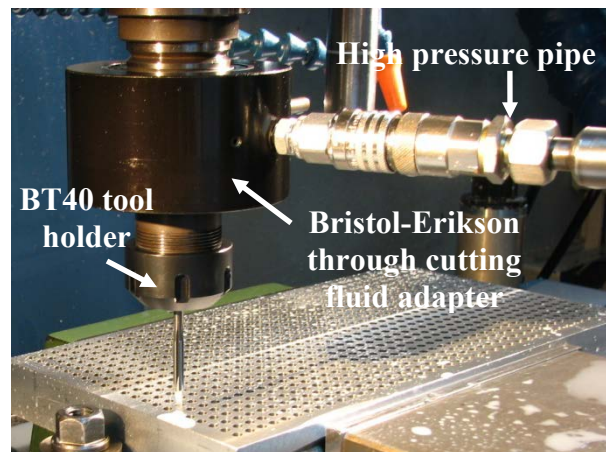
High pressure through-tool cutting fluid arrangement on FX-5 for Phase 3B and 4B
